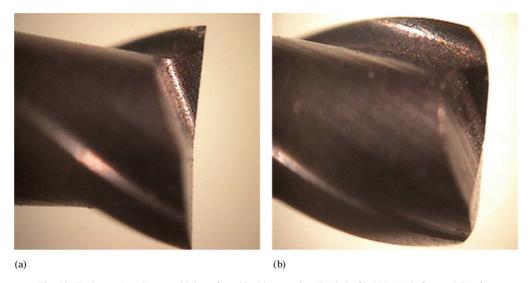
Tool wear by micro-machining of machinable ceramics (5 vol.% of h-BN): (a) before and (b) after.
